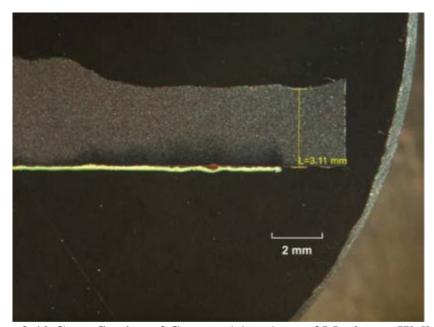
Cross Section of Coupon A1 at Area of Maximum Wall Loss
